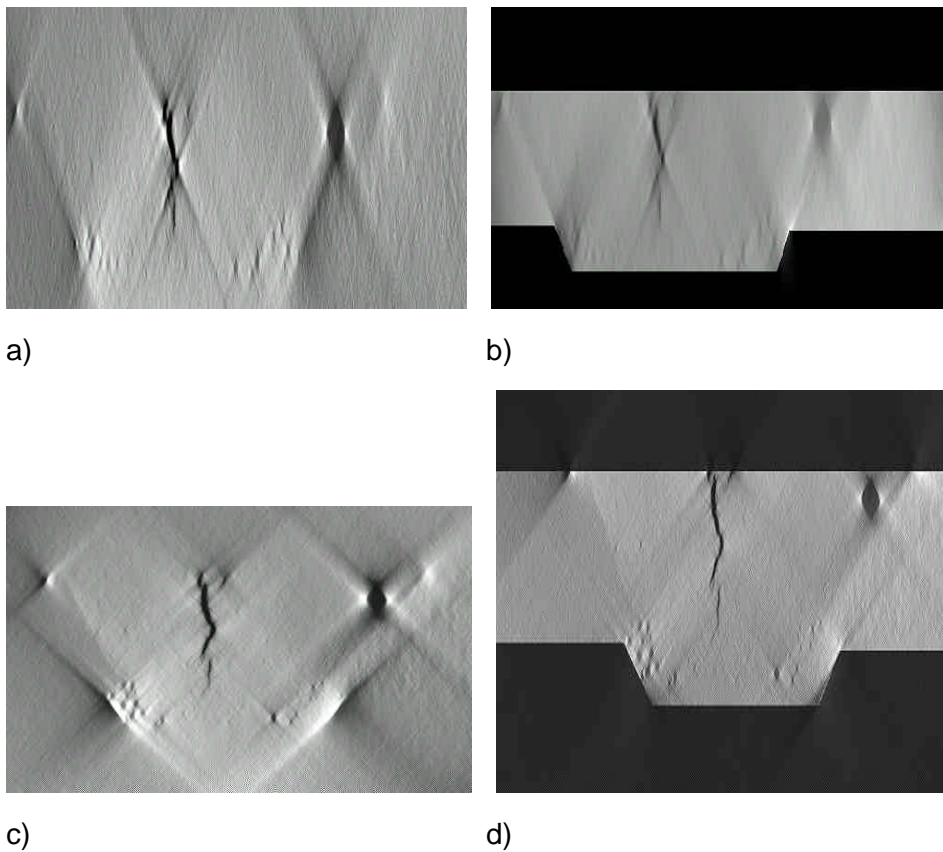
Aluminum seam weld with cracking and porosity
